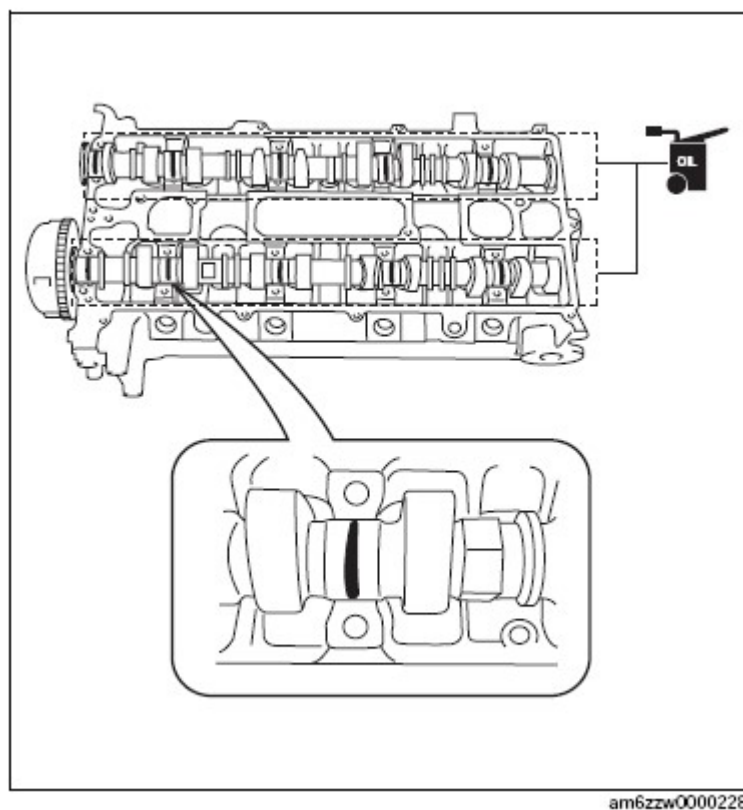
Applying Gear Oil (SAE No.90 Or Equivalent) To Each Journal Of Camshaft
